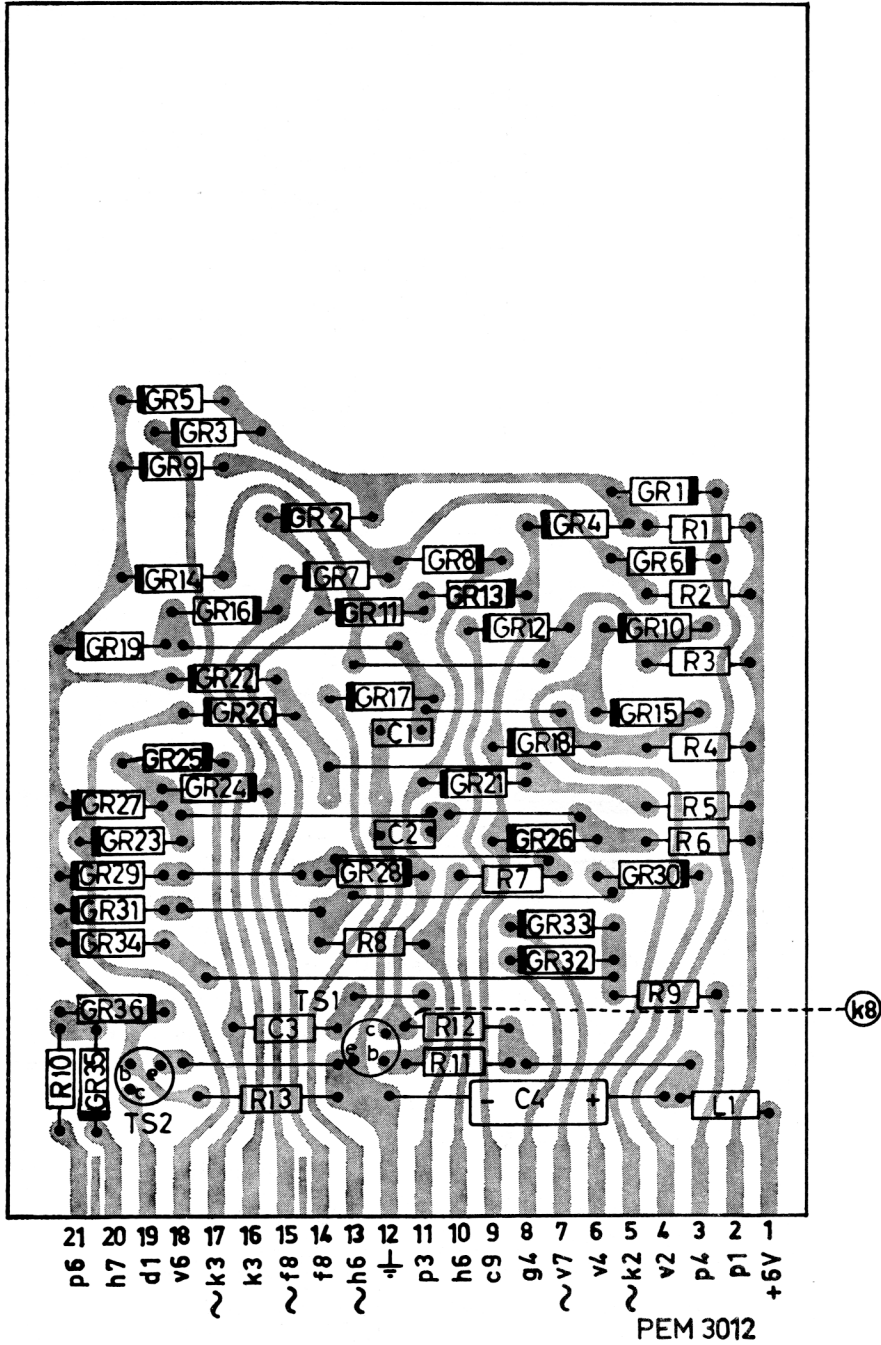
Printed wiring board, black/white steps, Unit 13
